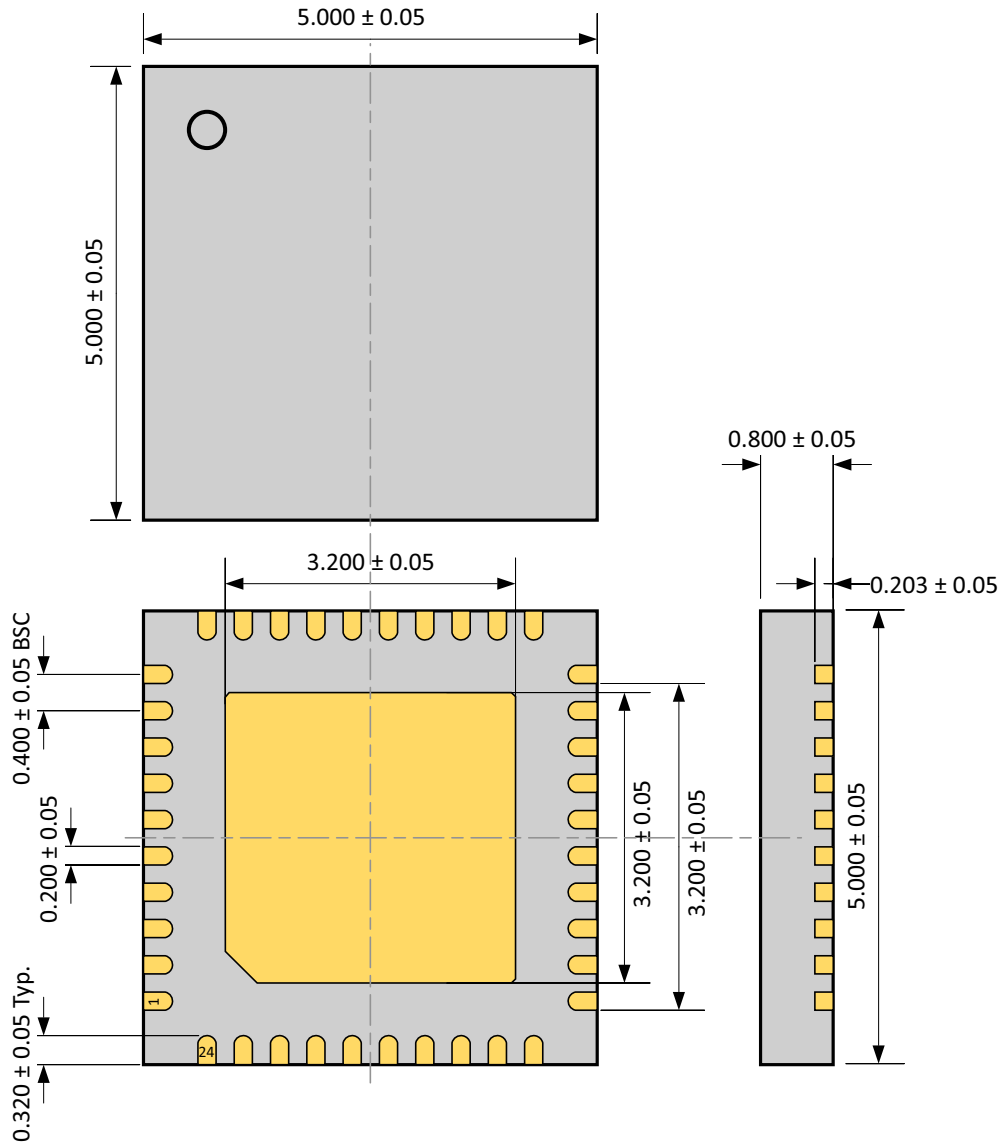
QFN 40-pin 5x5mm Drawing (All Dimensions in mm)
